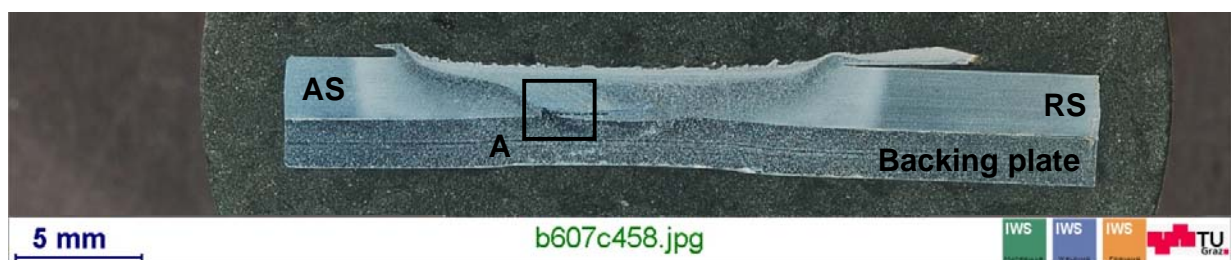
Macrograph for unsuccessful 15-5PH butt friction stir weld
